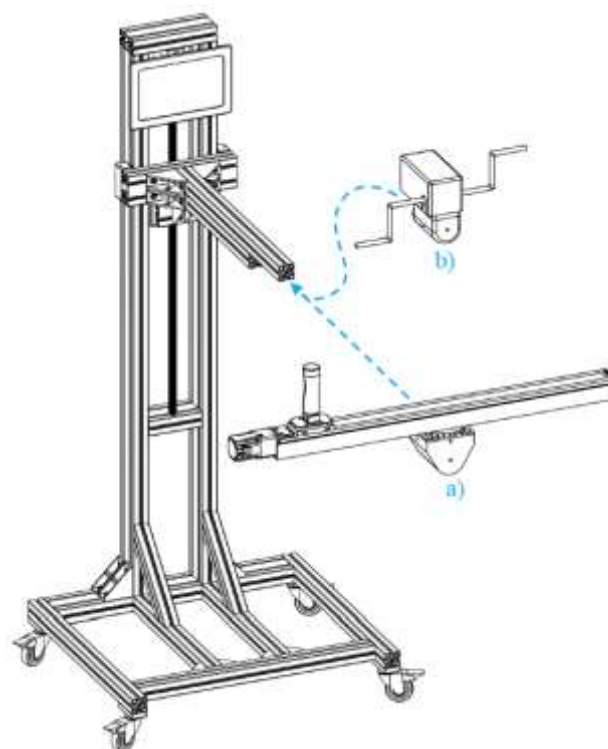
3D CAD model of the first ABLEFIT Prototype.
